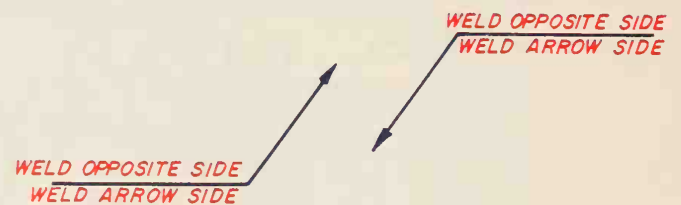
Any welding symbol placed on the upper side of the reference line indicates weld OPPOSITE side. Any welding symbol placed on the lower side of the reference line indicates weld ARROW side.
